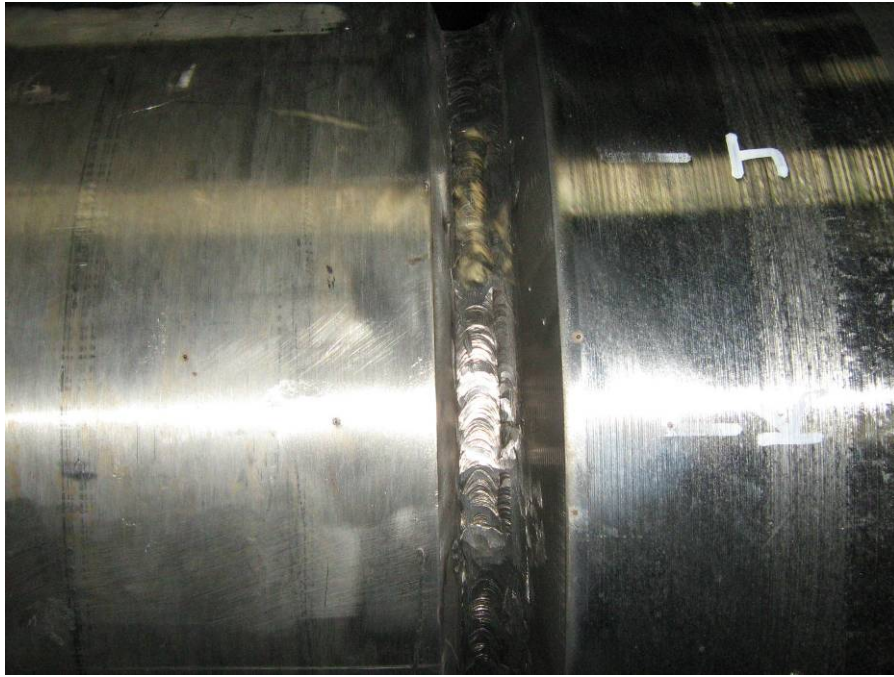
Photograph of a Typical SMAW Weld on the WOM Safe End to Stainless Pipe Weld
